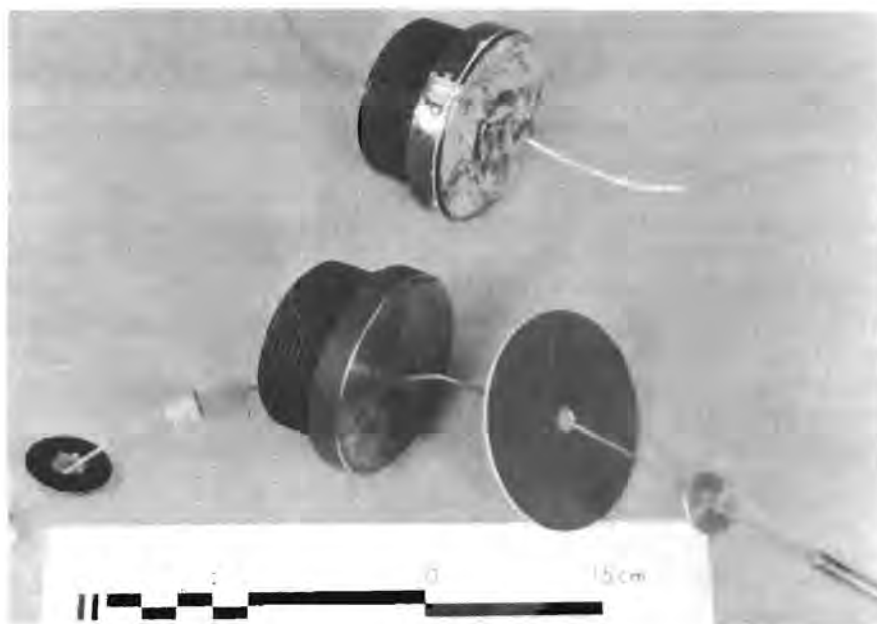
Exploded, Disassembled View of Modified Lifting Plug
